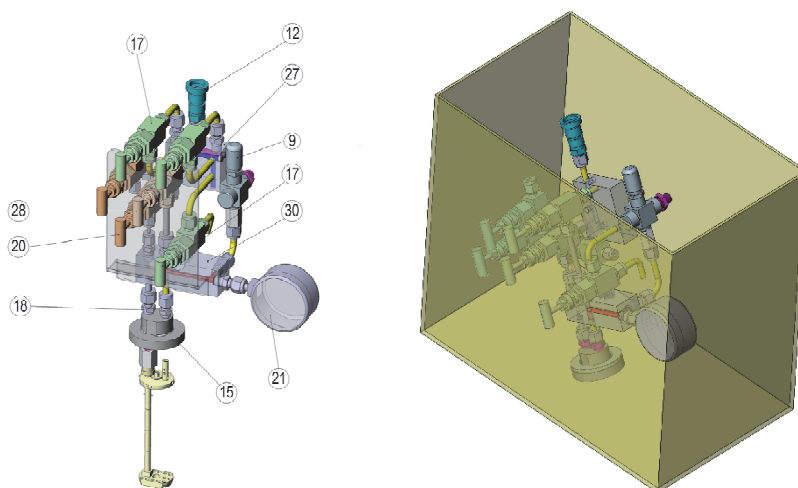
Design of autoclave head (left) and the tested dimension of the head in the hot cell conveyer container (right).
